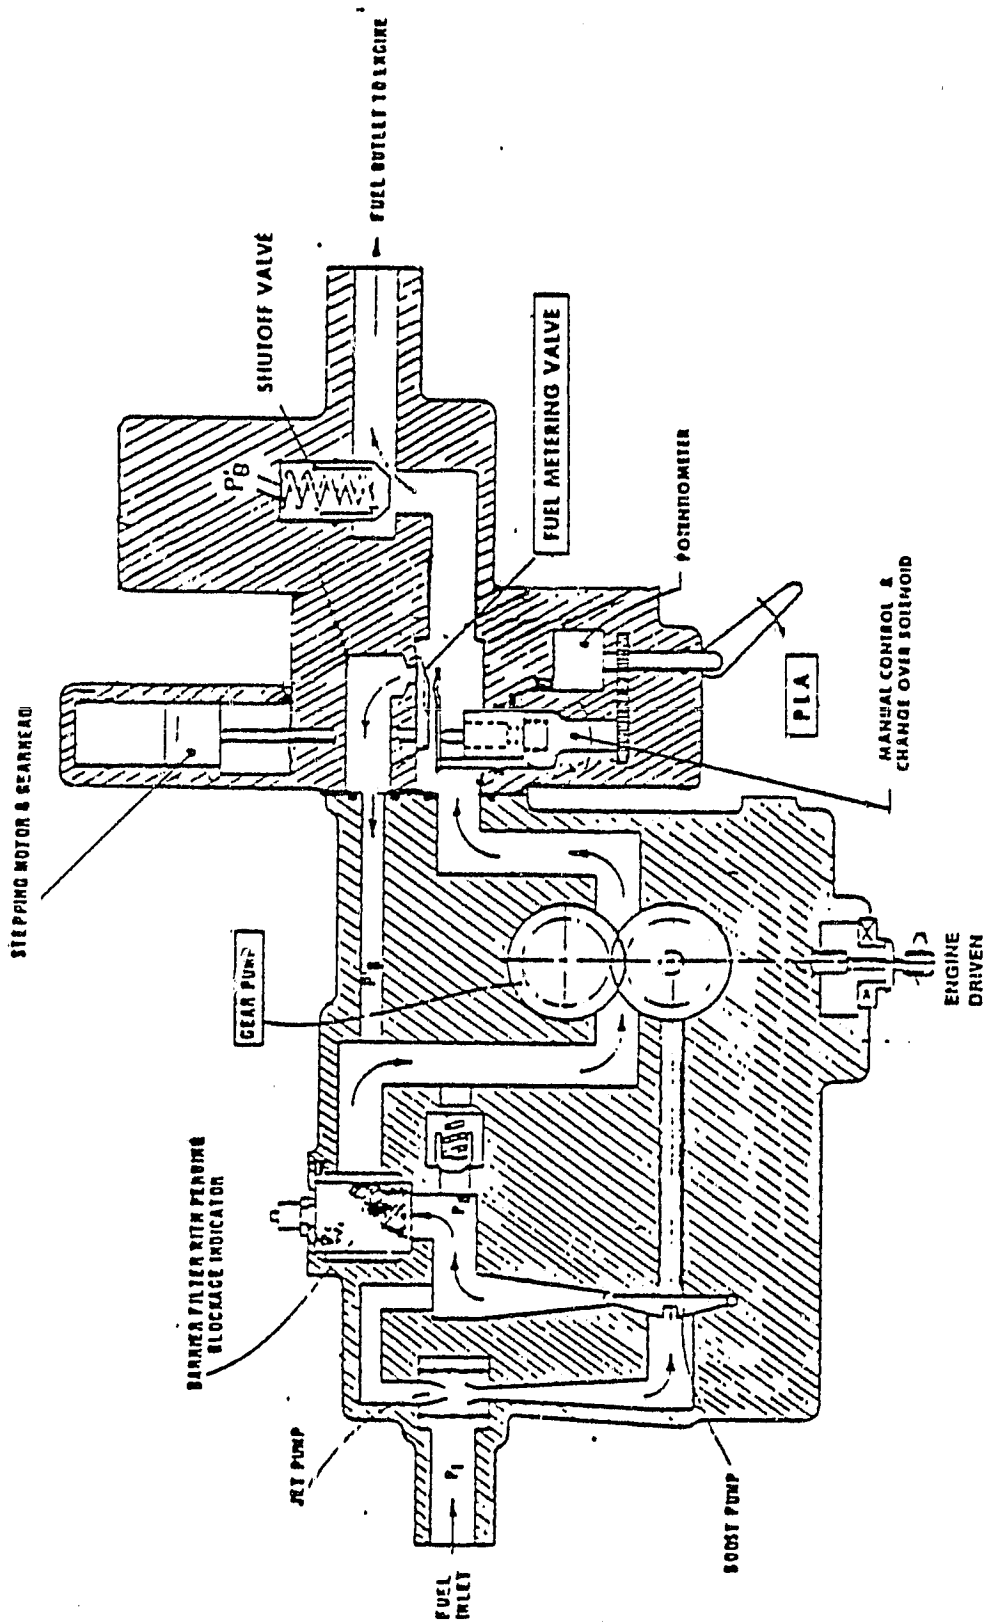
STEPPER MOTOR DRIVEN BYPASS VALVE
